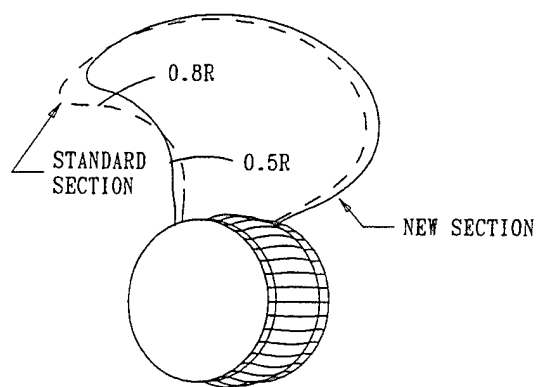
BLADE OUTLINES OF THE STANDARD AND NEW BLADE SECTION PROPELLERS
